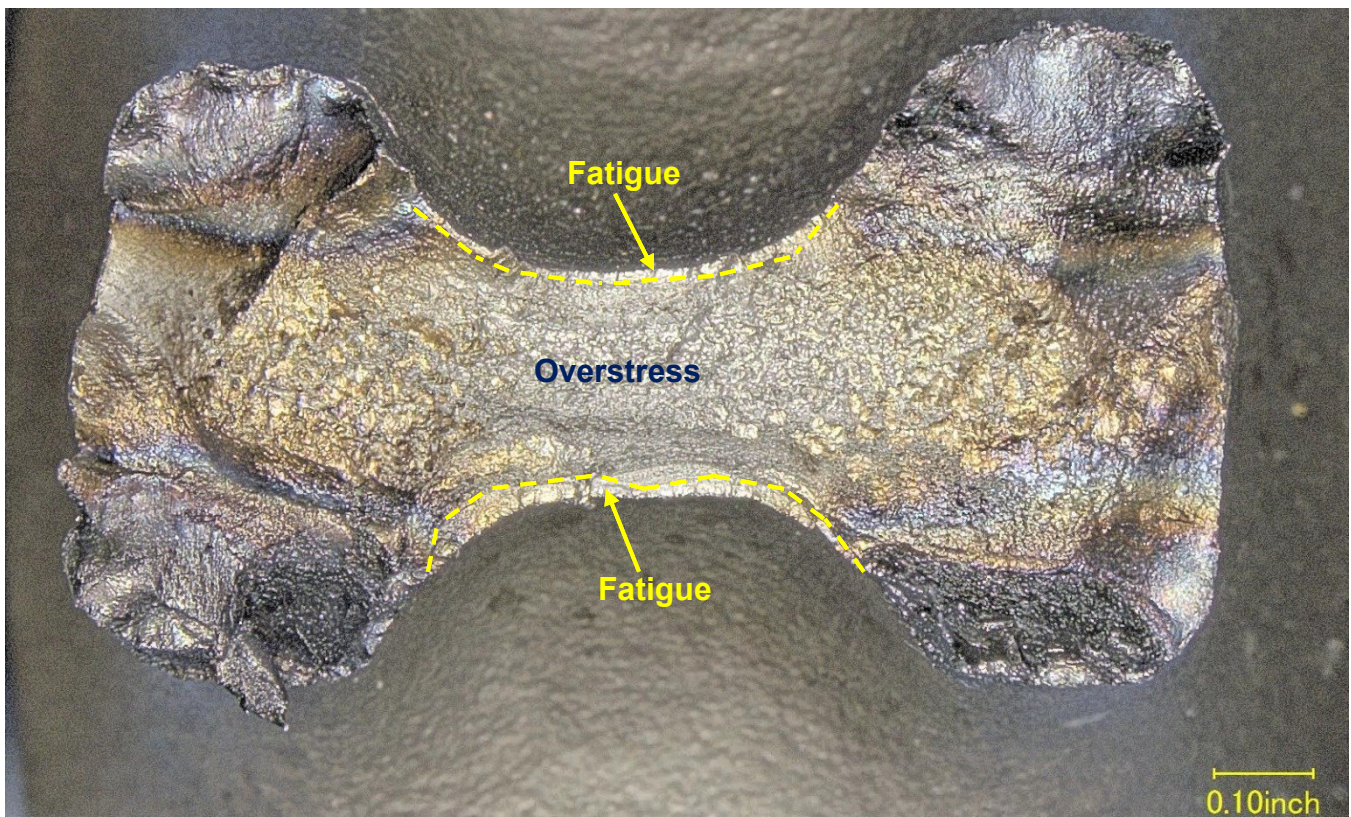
The #2 connecting rod fracture surface, from the crankshaft side.
